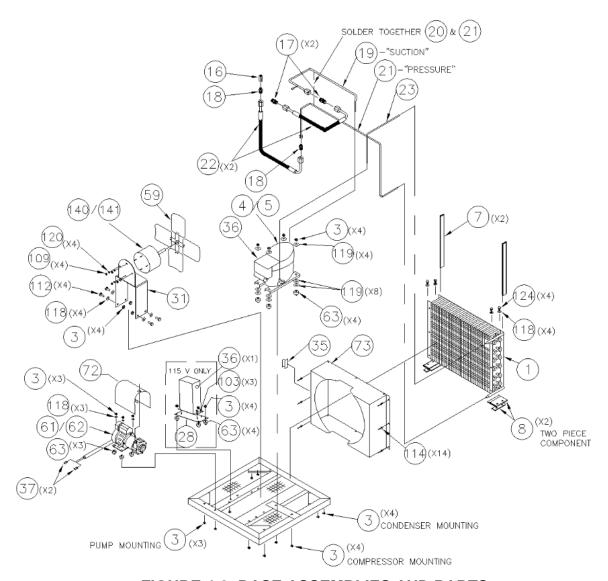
, BASE ASSEMBLIES AND PARTS
